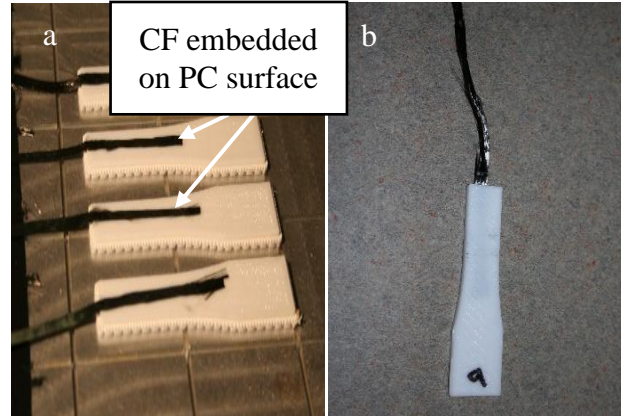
5 3D printed specimens for fiber pull out test to illustrate bonding behavior between PC and CF (a) CF embedded on PC material, (b) final specimen with fully encapsulated CF
